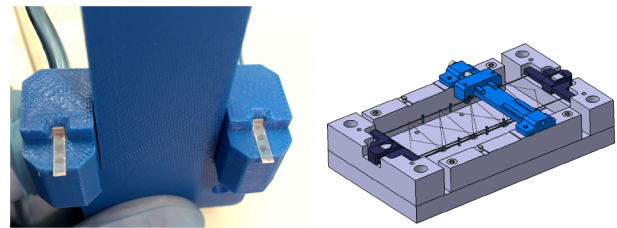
Positioning tool to hold two L-legs with vacuum (left). The mounting height of the L-leg is defined by the tool, in lateral direction they are moved onto the CF-ladder structure (right).
